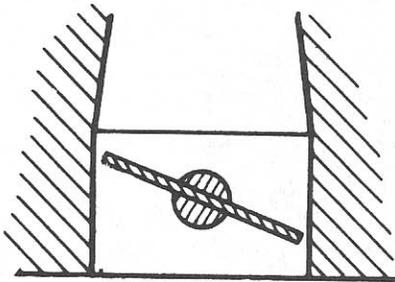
Fast idle throttle opening checking location (Sec 8)
